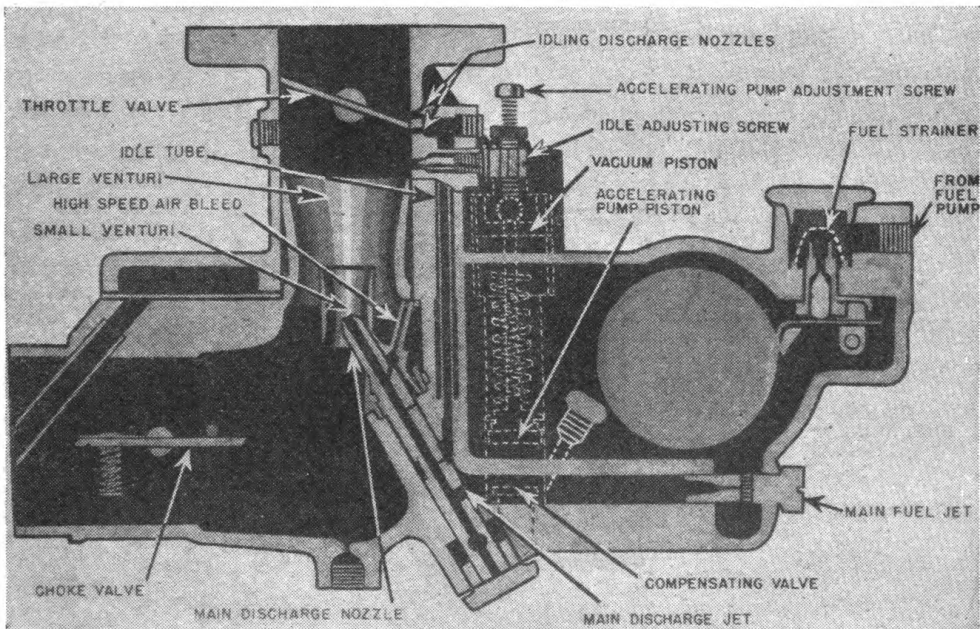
Sectional view of an air bleed, updraft, heavy duty type carburetor.
